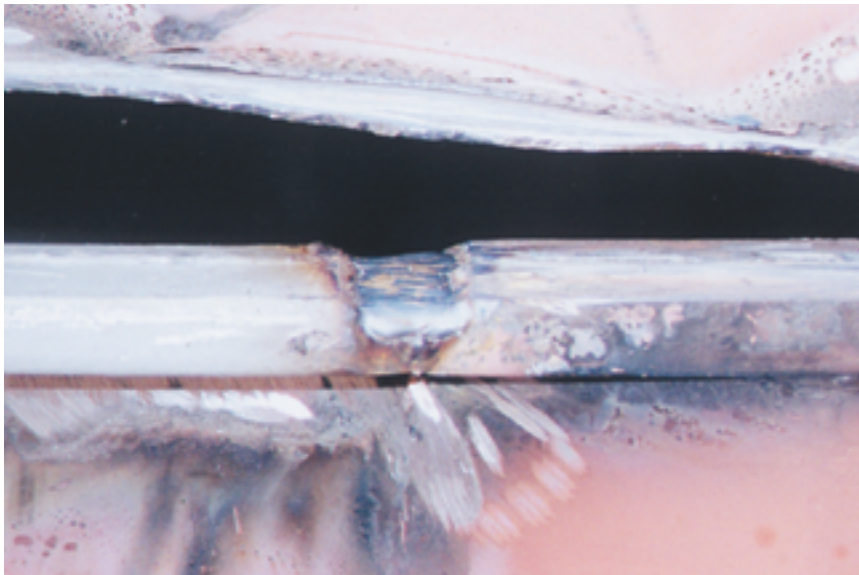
(to left) / Welding of flat-bar top side rail section to original rail (third pass)
